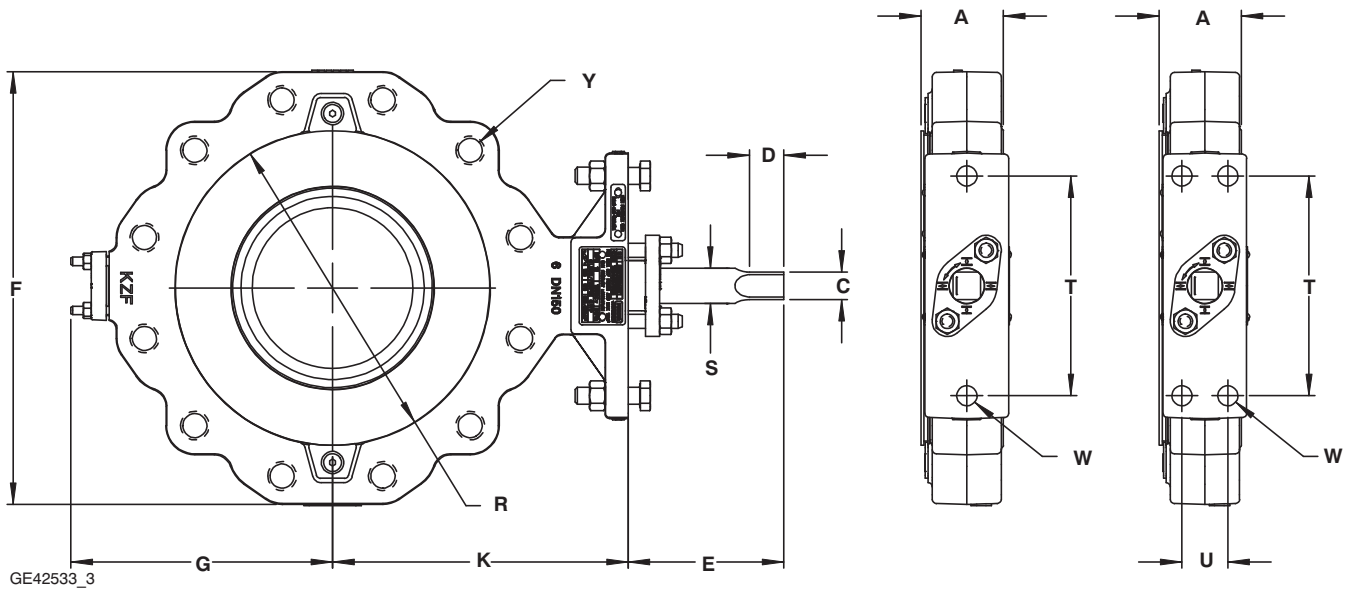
Dimensions for Fisher® A81, Single Flange Valve
